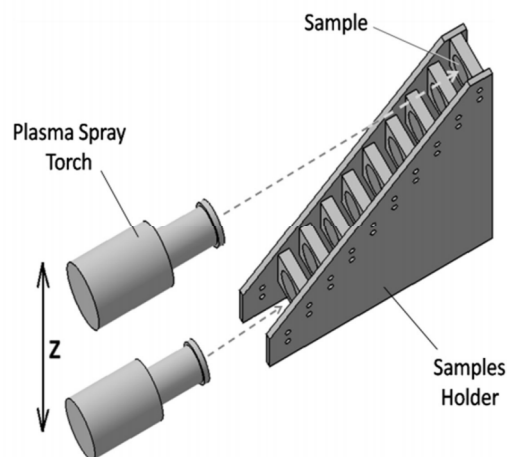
Specimens mounted on fixture at distances of 2 cm related to each other.
